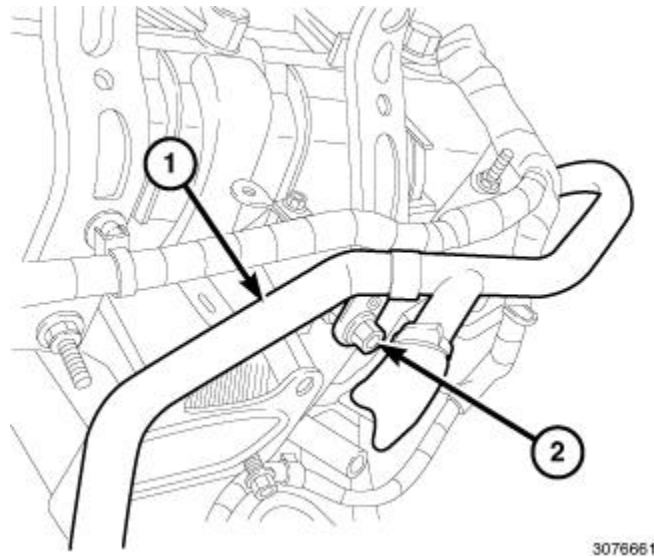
Heater Core Return Tube Upper Support Bracket Retaining Nut & Tube
